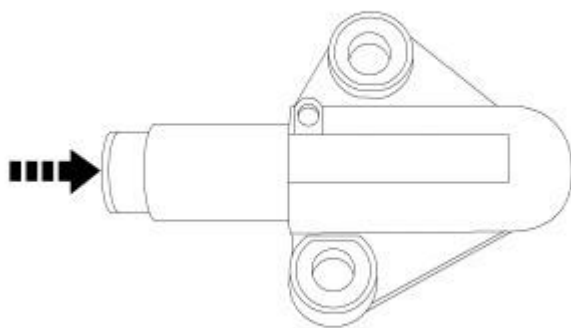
Pushing Tensioner Piston Back Into Tensioner Body
